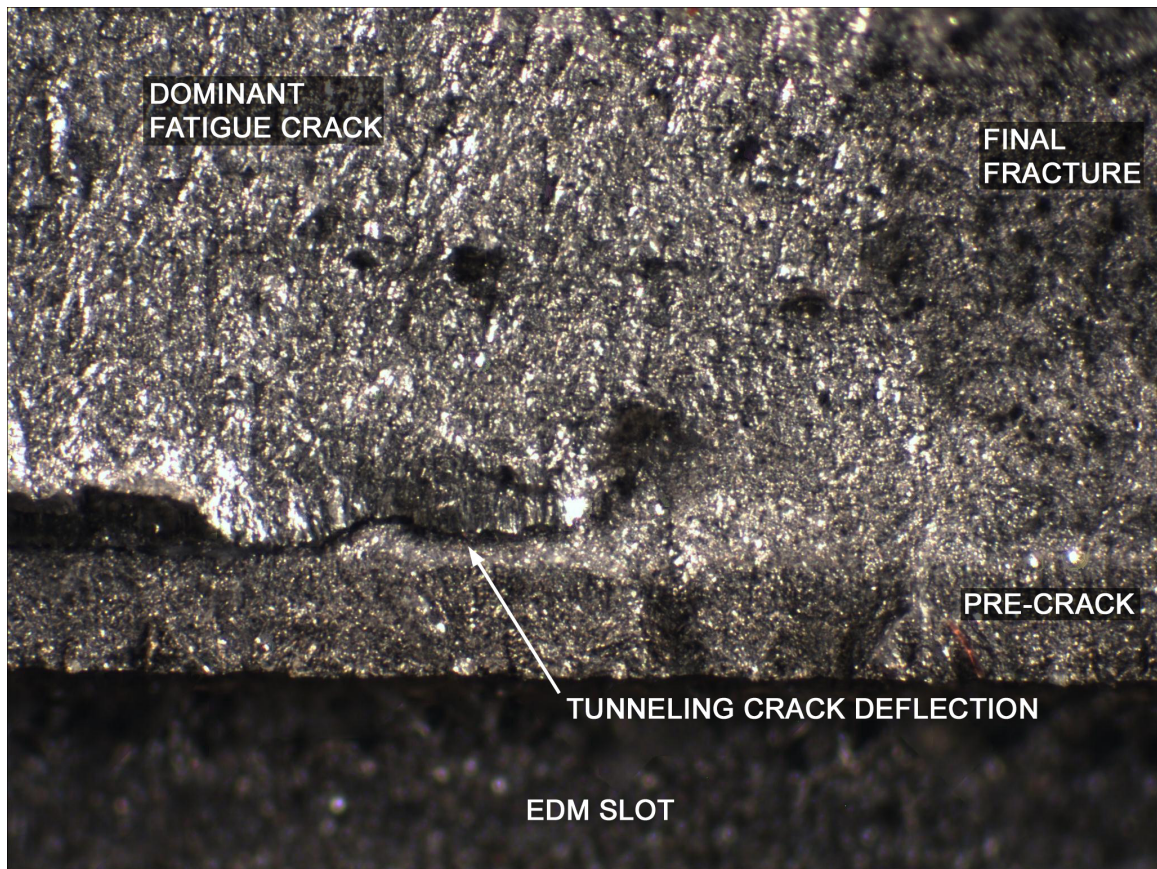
Close-up of left-back quadrant of bottom fracture surface (label “E” in Fig. 5.38) revealing a tunneling crack deflection below dominant crack.
